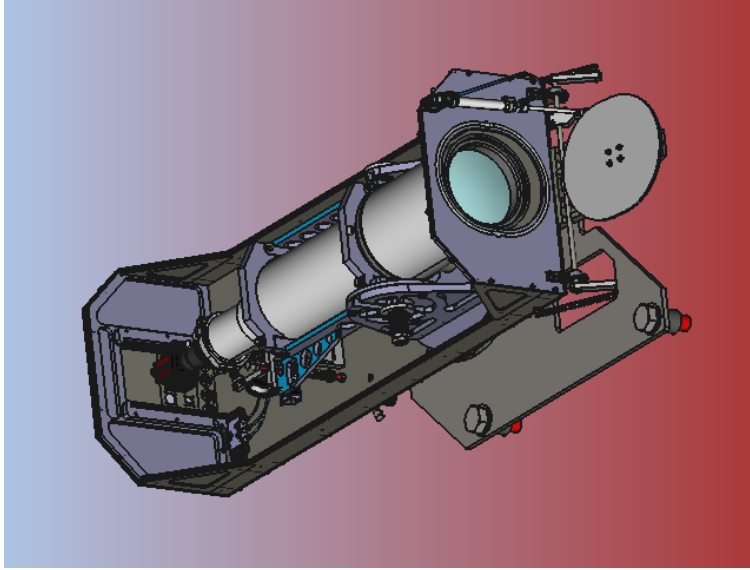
CAD model of the LAT housing with cover missing. Design was drafted by Christian Rehm in Isen.
